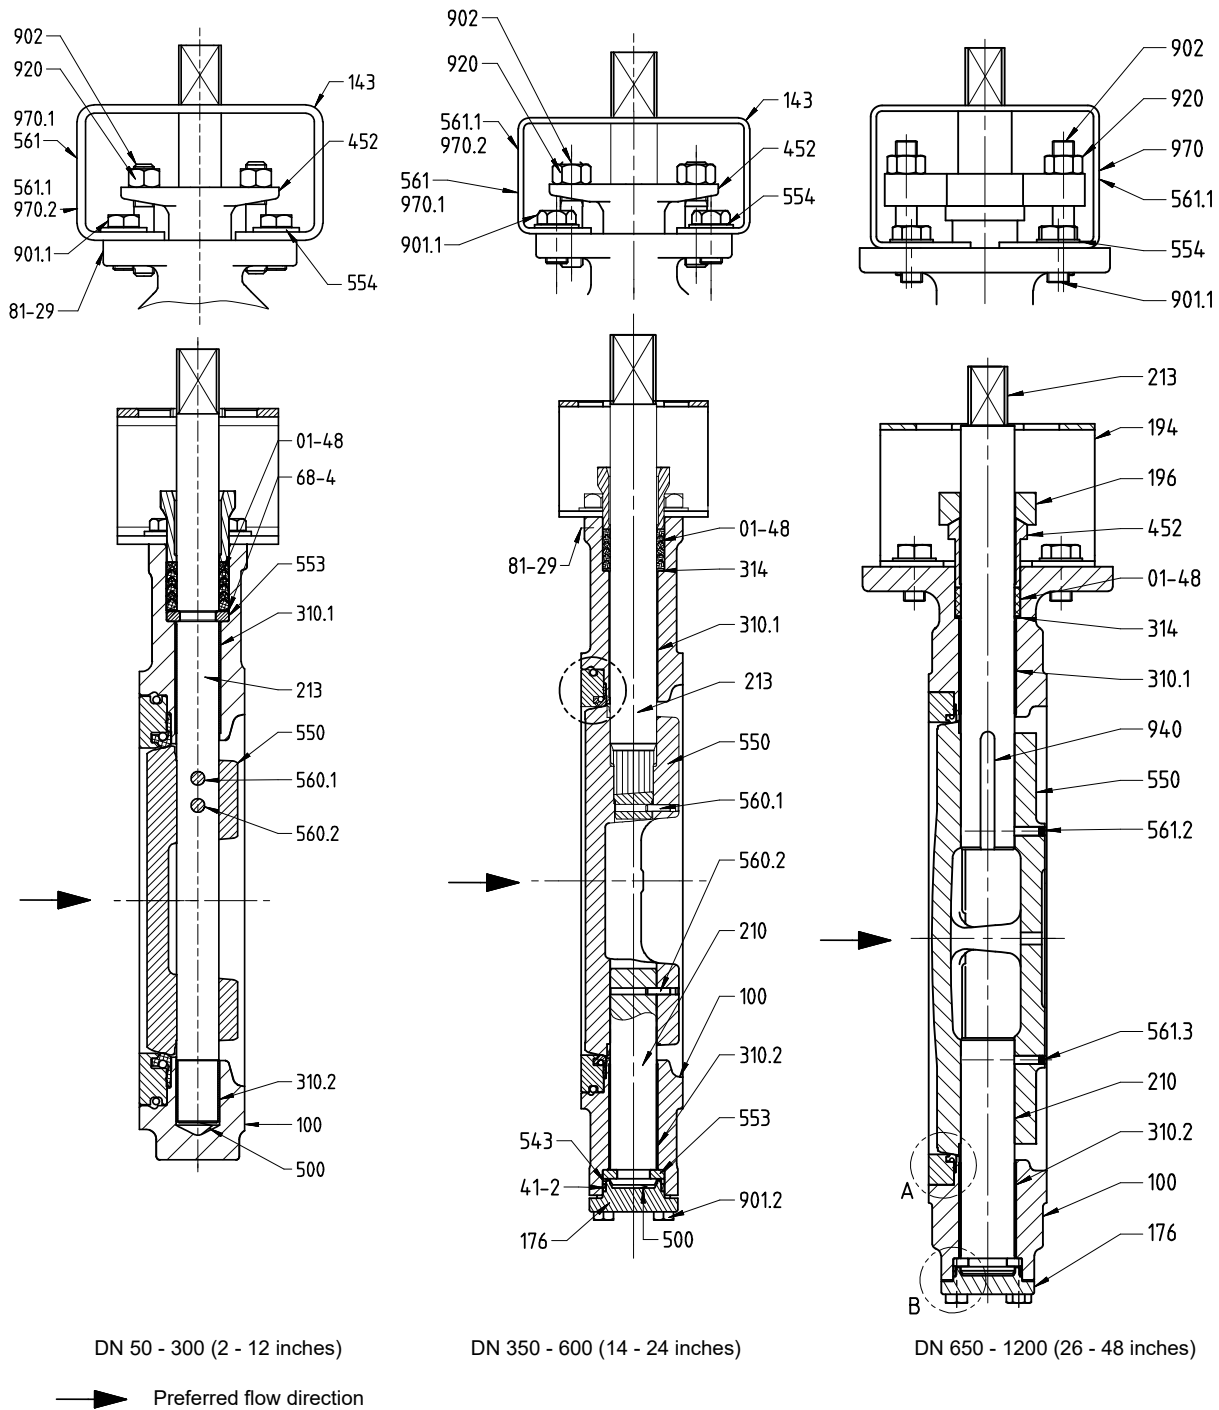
Sectional drawing of DANAIS 150 DN 50 - 1200 (2 - 48 inches)
